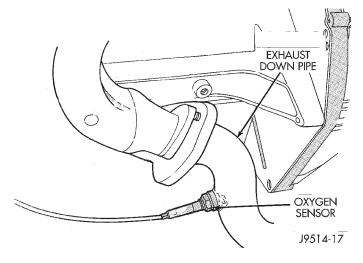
Upstream Oxygen Sensor—4.0L Engine
